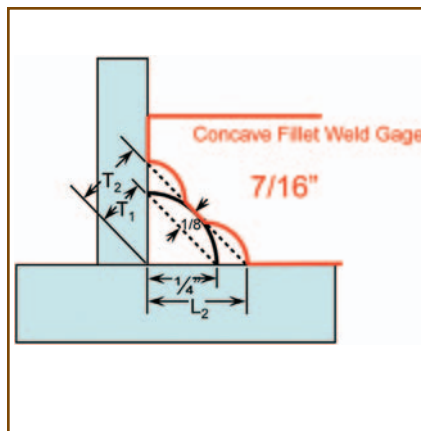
Use of a concave fillet weld gauge to approximate the amount of permissible convexity.
